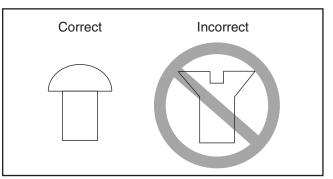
Correct and incorrect screw types for mounting workpiece to faceplate.
